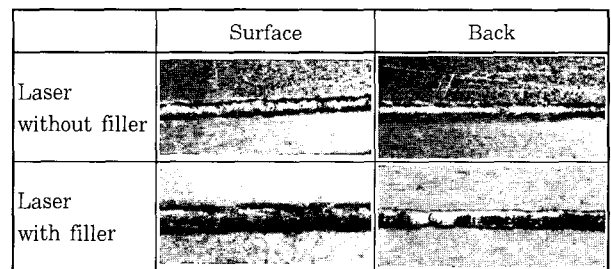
Appearances of weld bead without and with filler wire
